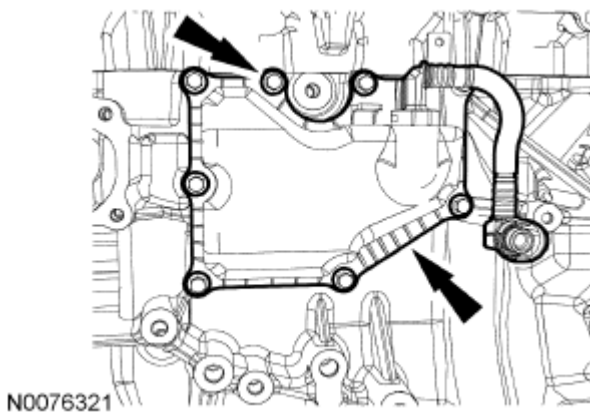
Locating Bolts And Crankcase Vent Oil Separator
